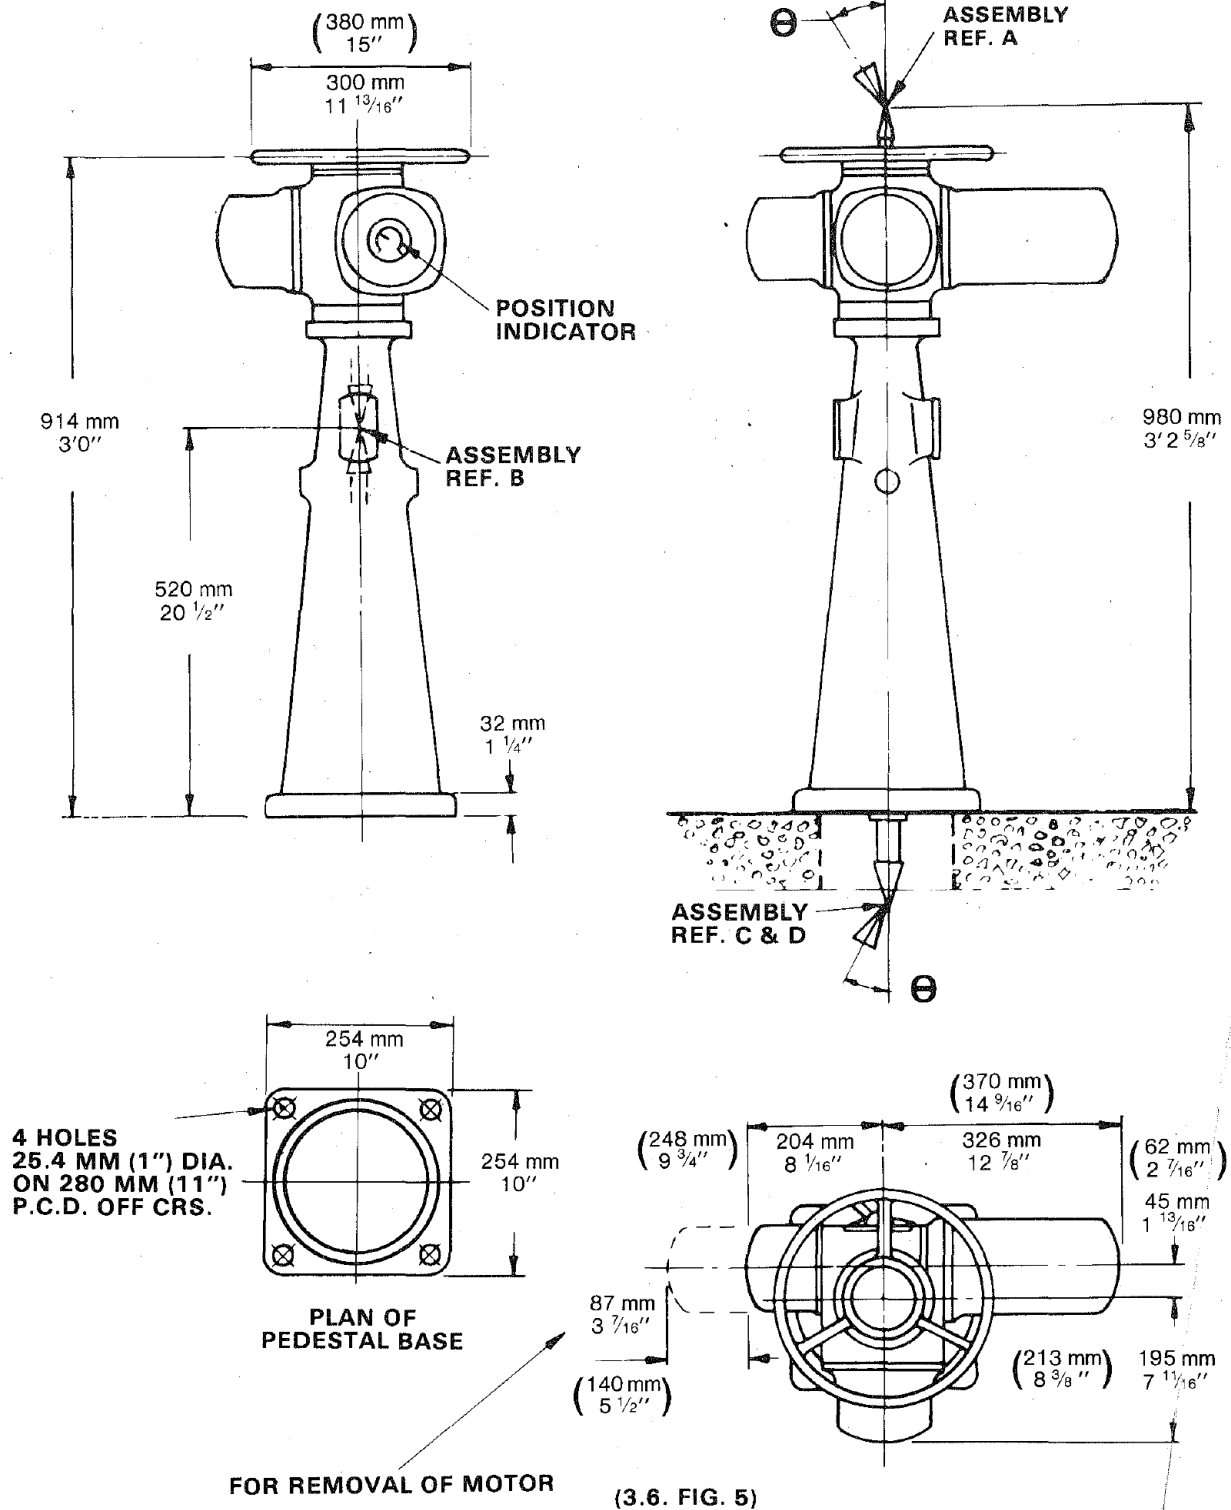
DIMENSIONS SHOWN IN BRACKETS
